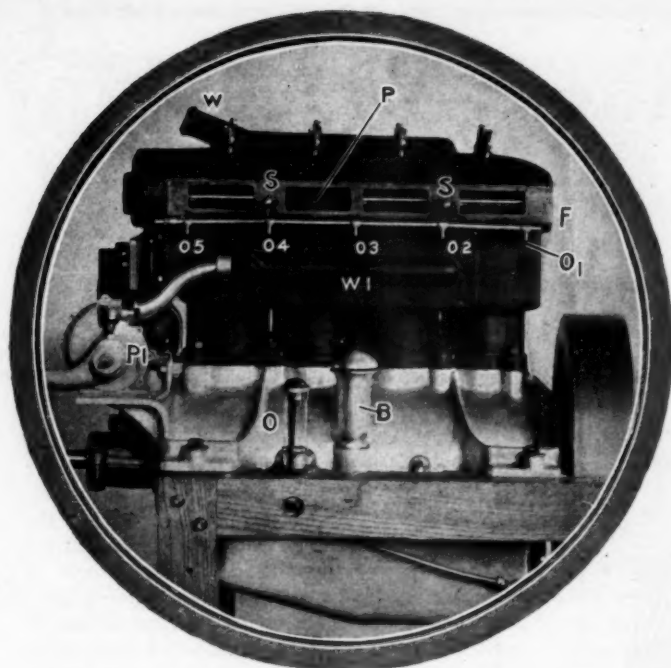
Exhaust side of the Mead motor with the manifold removed and the rotary sleeve valve in sight
